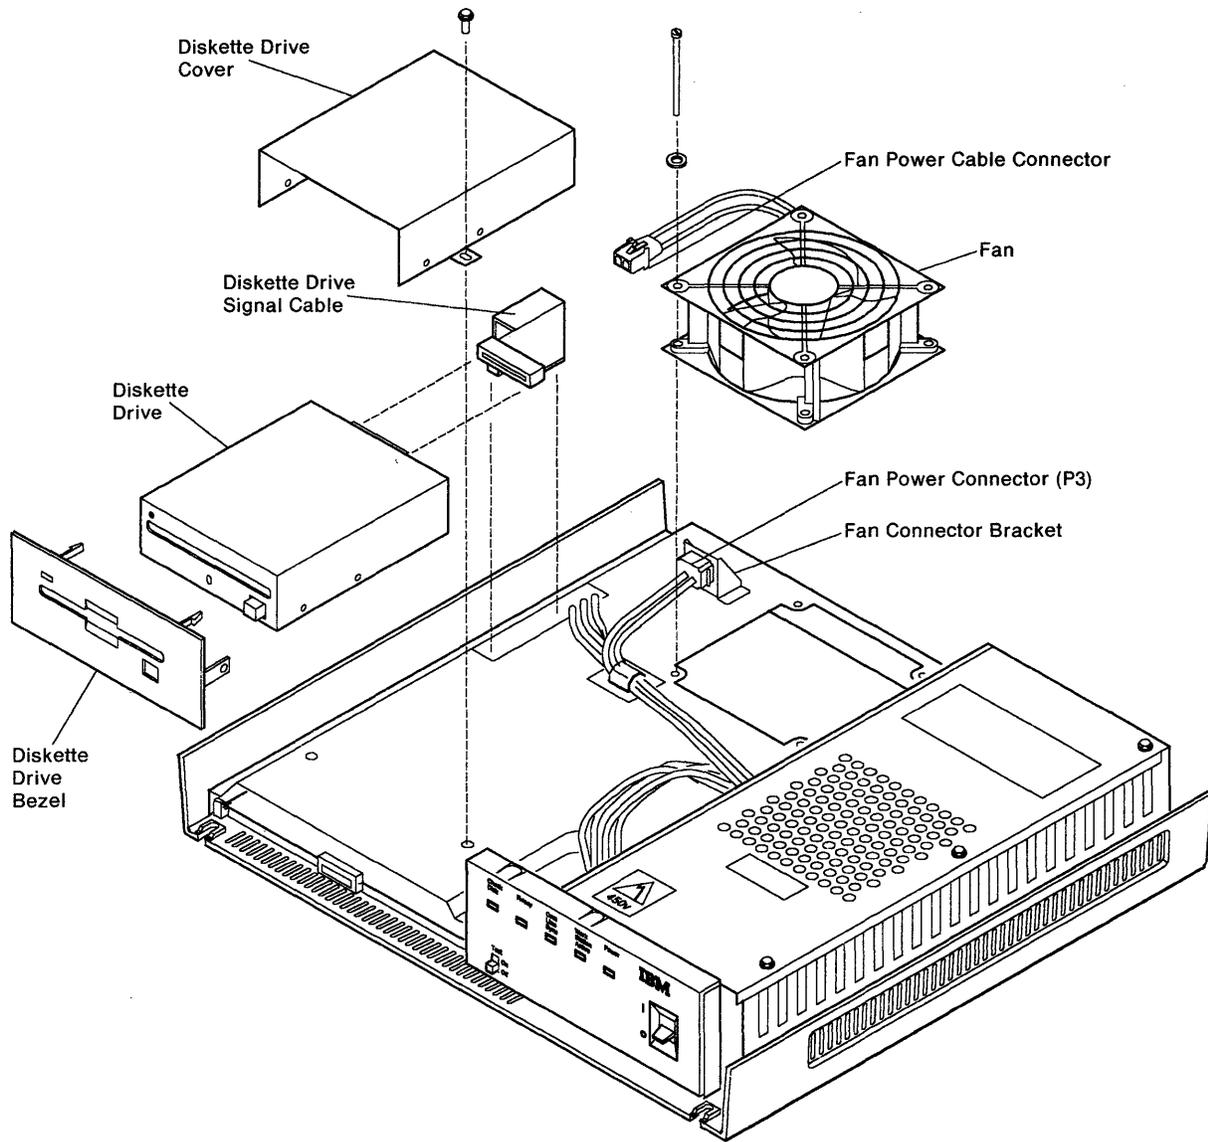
Diskette Drive and Fan Removal and Replacement
